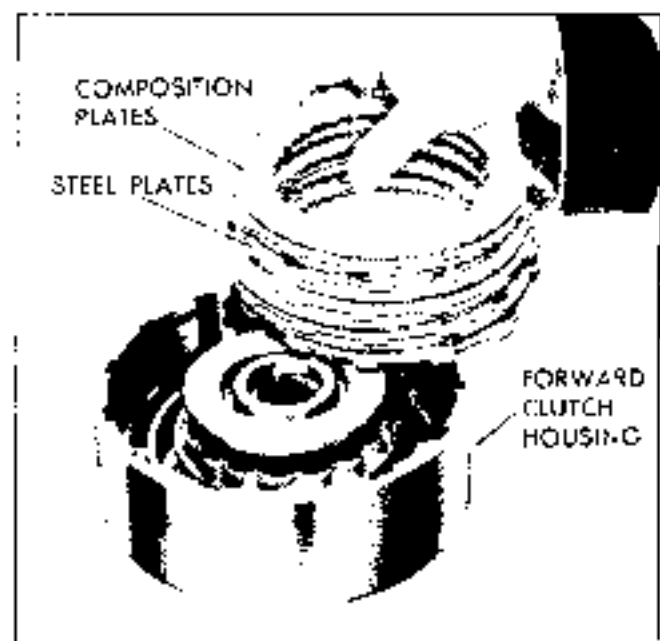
E-86 Installing Forward Clutch Compositor and Steel Plates
